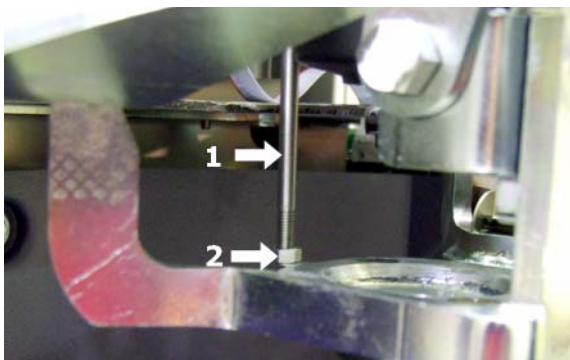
The striking rod (1) is locked with a nut (2) and they are behind the puncher blade.
